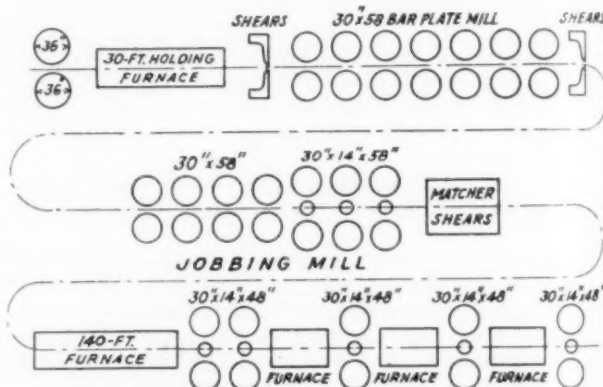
SHEET MILL, AMERICAN ROLLING MILL CO., ASHLAND, KY.
